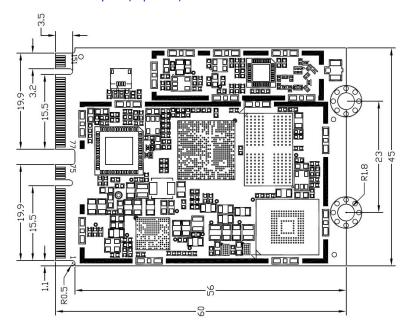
Dimensions of the VIA SOM-3000 module (top view)
